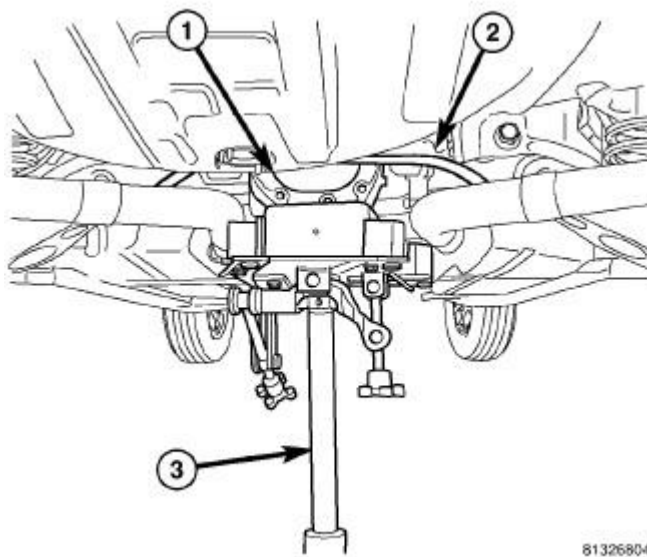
SUPPORT REAR SUSPENSION USING JACK
